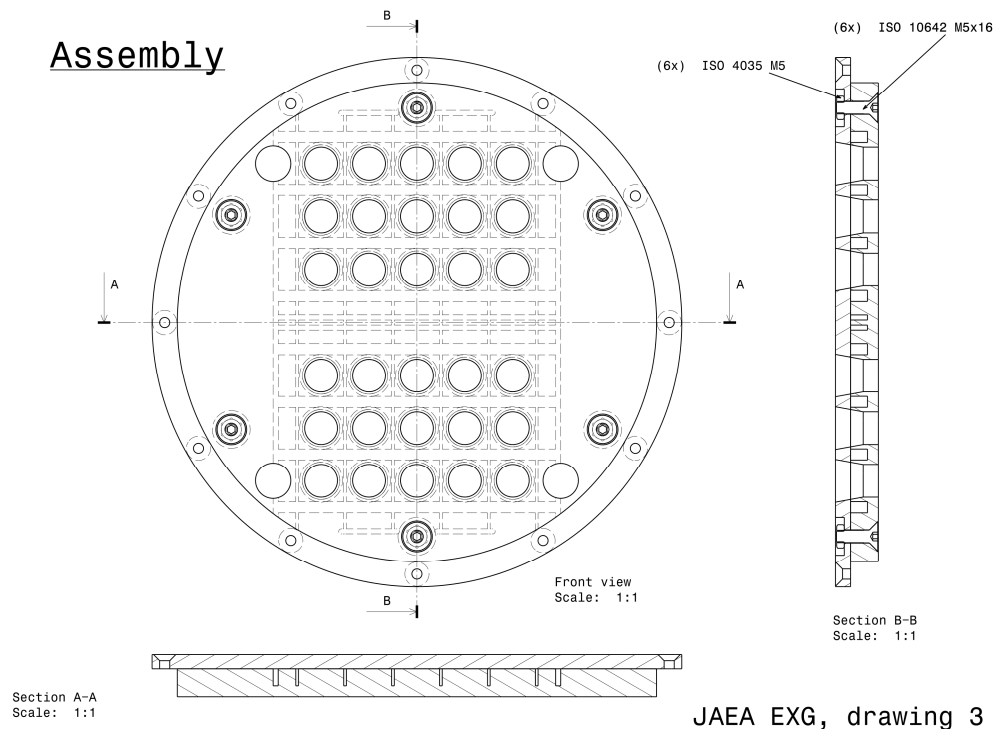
Mechanical drawing of new EG for NITS, assembly.
